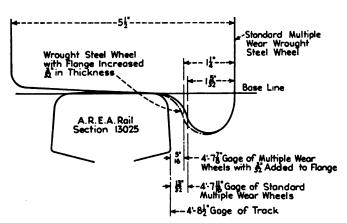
Position on rail of standard multiple-wear wrought steel wheel mounted to gage and same wheel with 3/32-in. of metal added to face of flange
